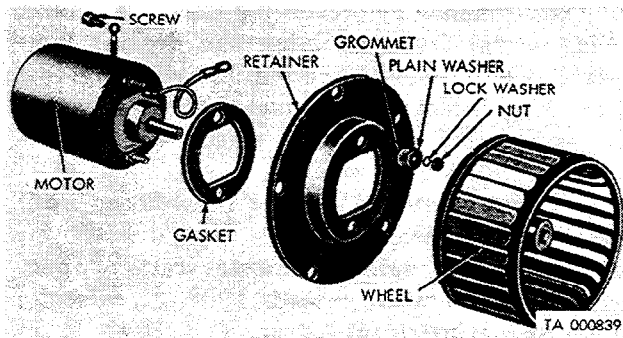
Blower motor, wheel, and related parts—exploded view.
